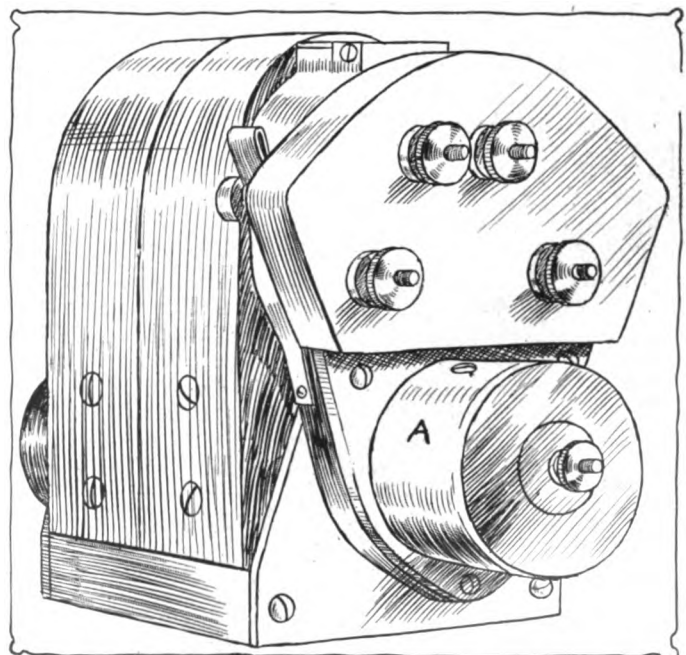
Exterior of the fixed spark magneto showing cap A to be removed
